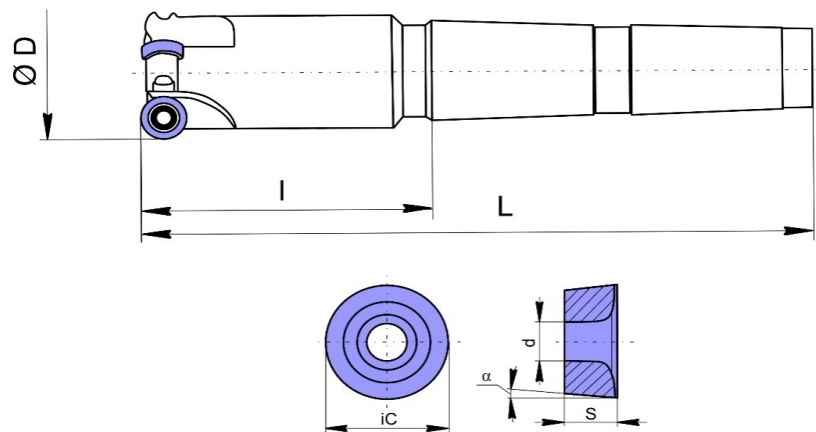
Layout view and geometric parameters of the milling cutter and removable cutting insert
